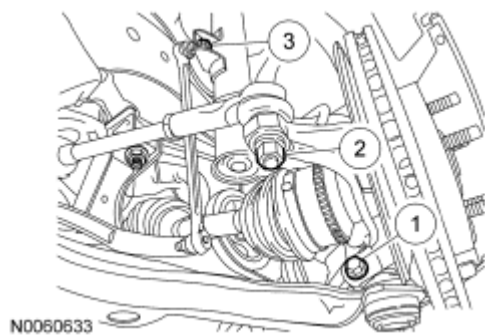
Identifying Bolt, Nut And Stabilizer Bar Link
